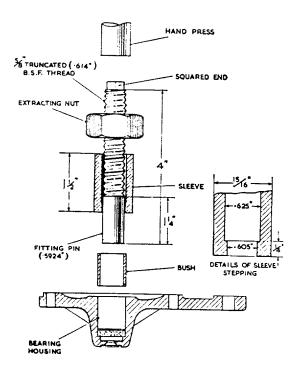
Tool for fitting Commutator End Bracket Bush.
